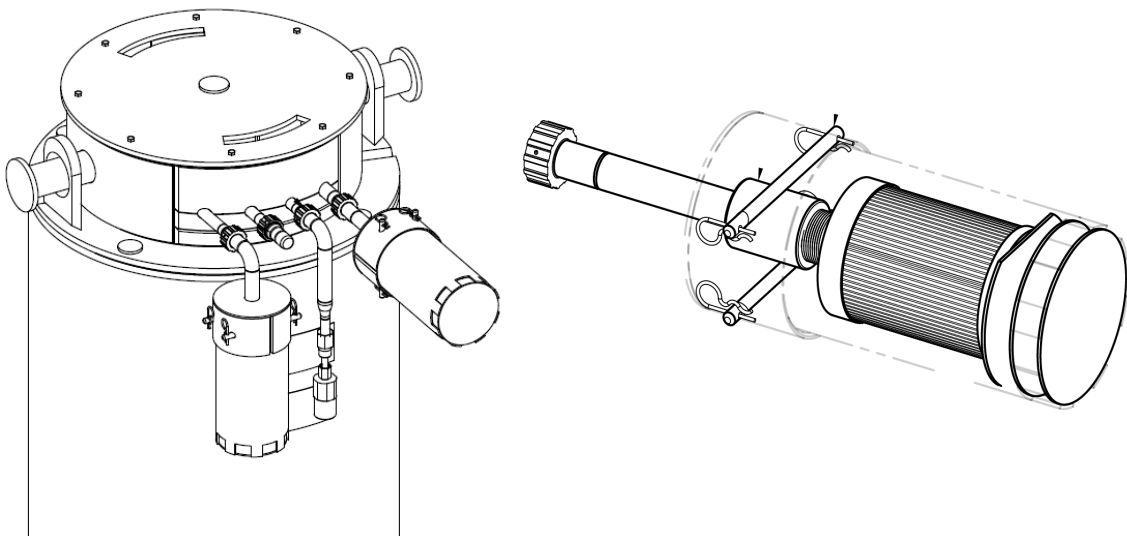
1 TSCR Cask Head Space and Hepa Filter Assembly
